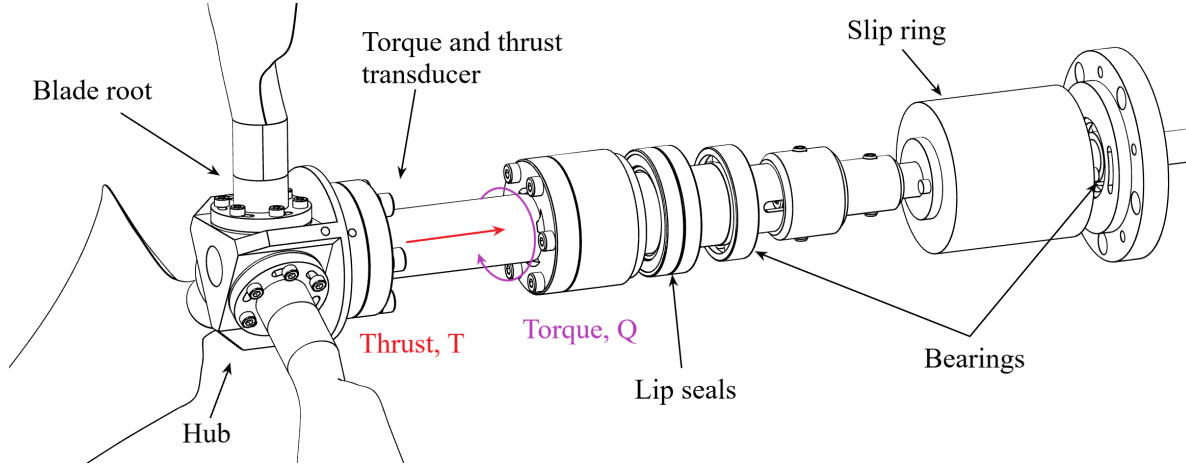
Close up view of torque and thrust transducer arrangement with forward drive line.
